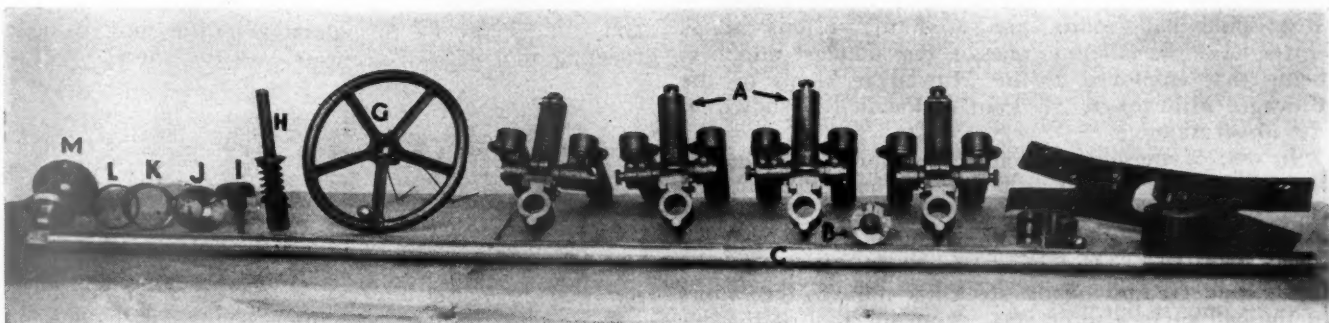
Details of the boring-bar for crank-shaft bearing seats and the facing and filleting tool for connecting-rod bearings
